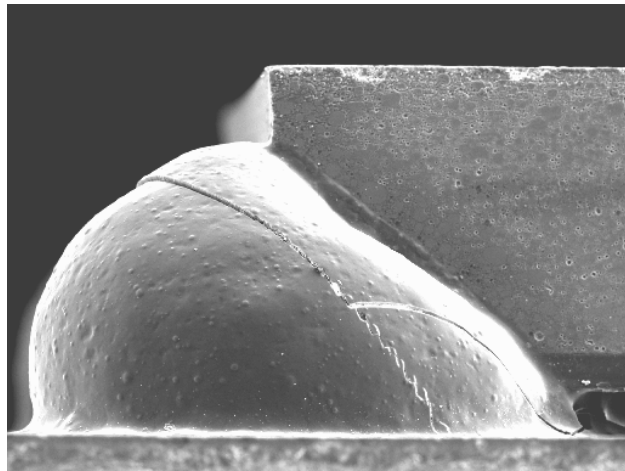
Photograph of Cracked Corner Bond Underfill after Drop Testing.
